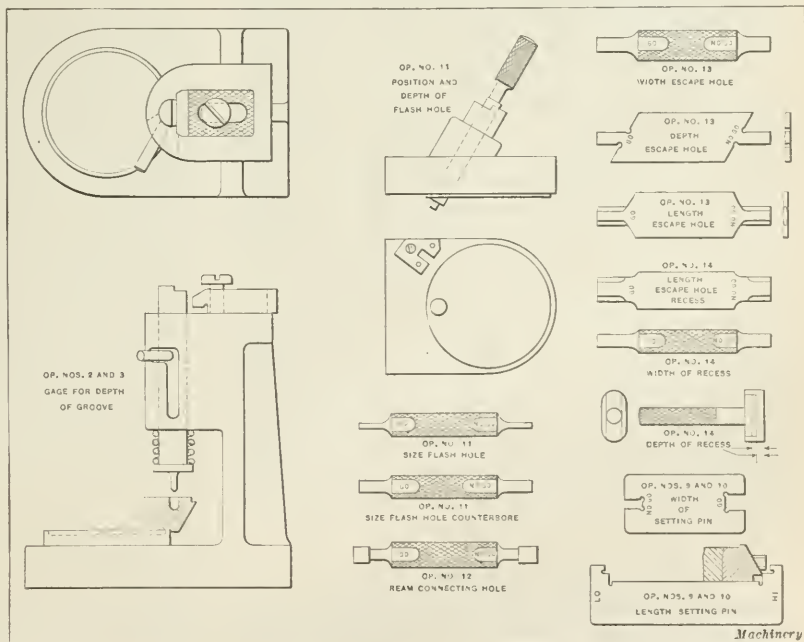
Other Examples of Gages used in manufacturing Fuse Parts
